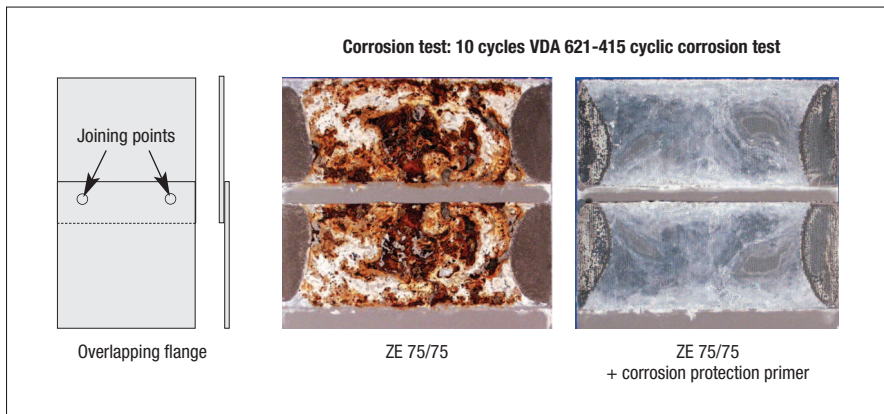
Corrosion behaviour of sheet metal bodywork with corrosion protection primer on flanged test joints (open flange)
